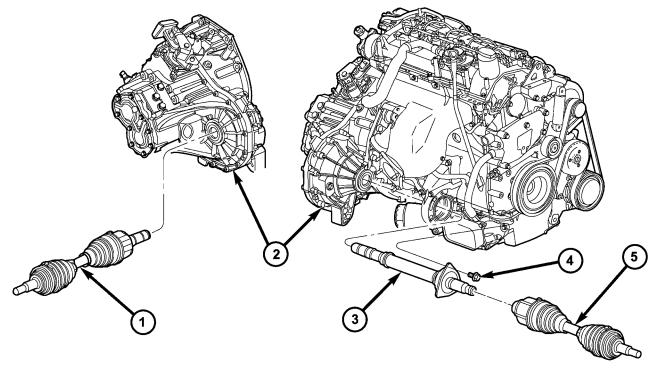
Halfshaft and Intermediate Shaft (2.2L TD Shown—2.4L Turbo Similar)
